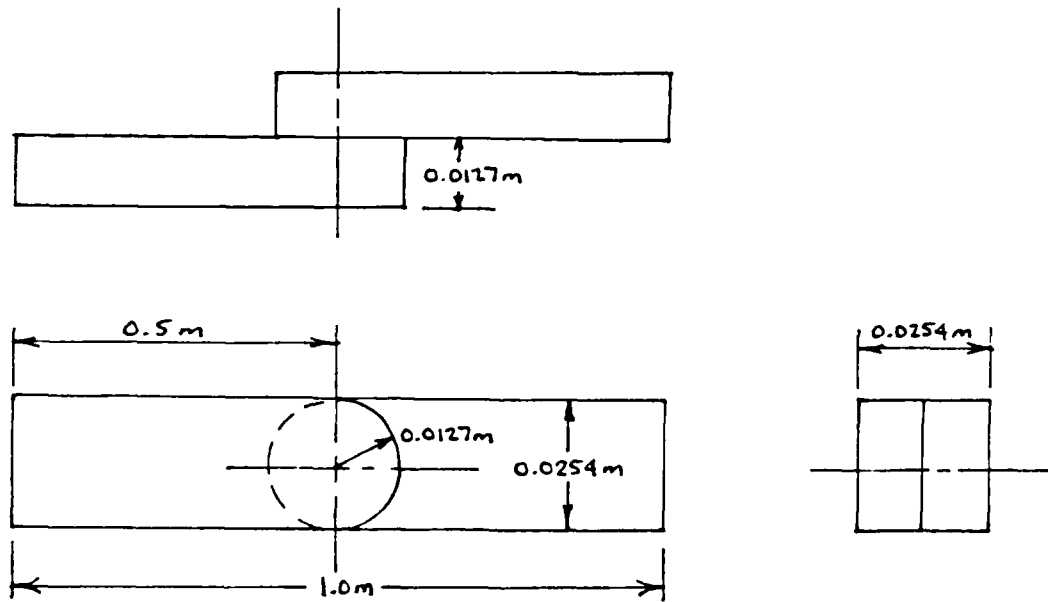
PHYSICAL BEAM DIMENSIONS
